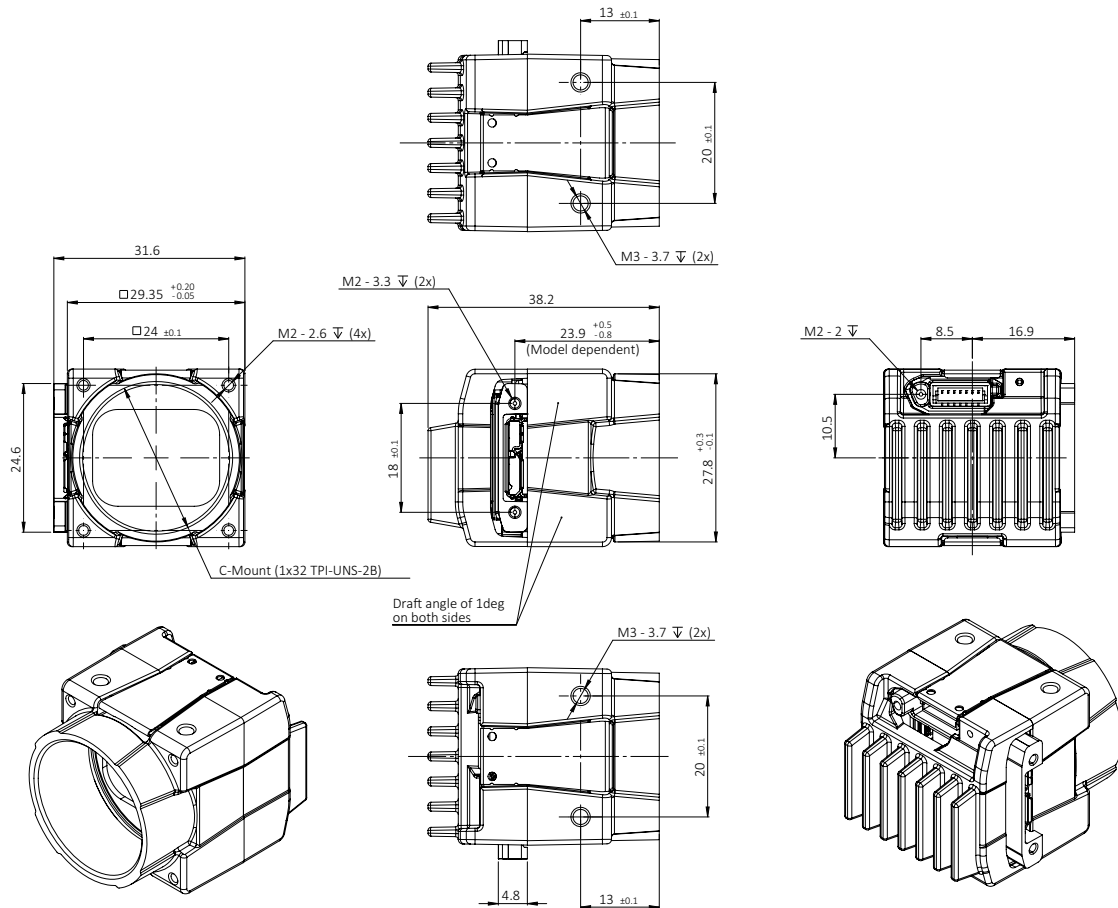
Closed Housing C-Mount 90° (standard Alvium) dimensions
